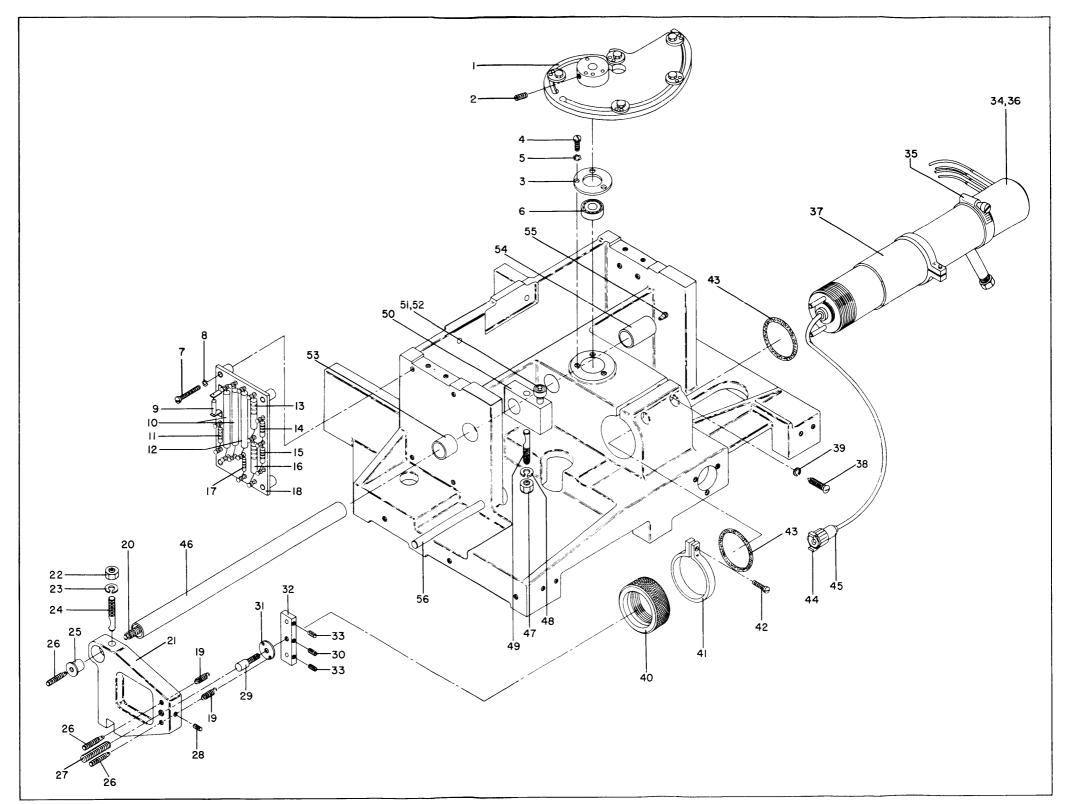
Oscillator Drive Assembly, Bottom Exploded View (Sheet 1 of 2 Sheets), Index Nos. 1 through 56
